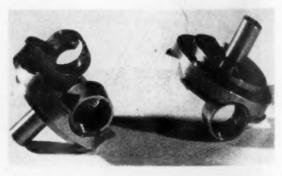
Part for guided missile requires 57 machining operations. Accuracy within plus or minus 0.0001 in. is required on many of its surfaces. Wide range of precision tool room equipment is used in machining the part.
